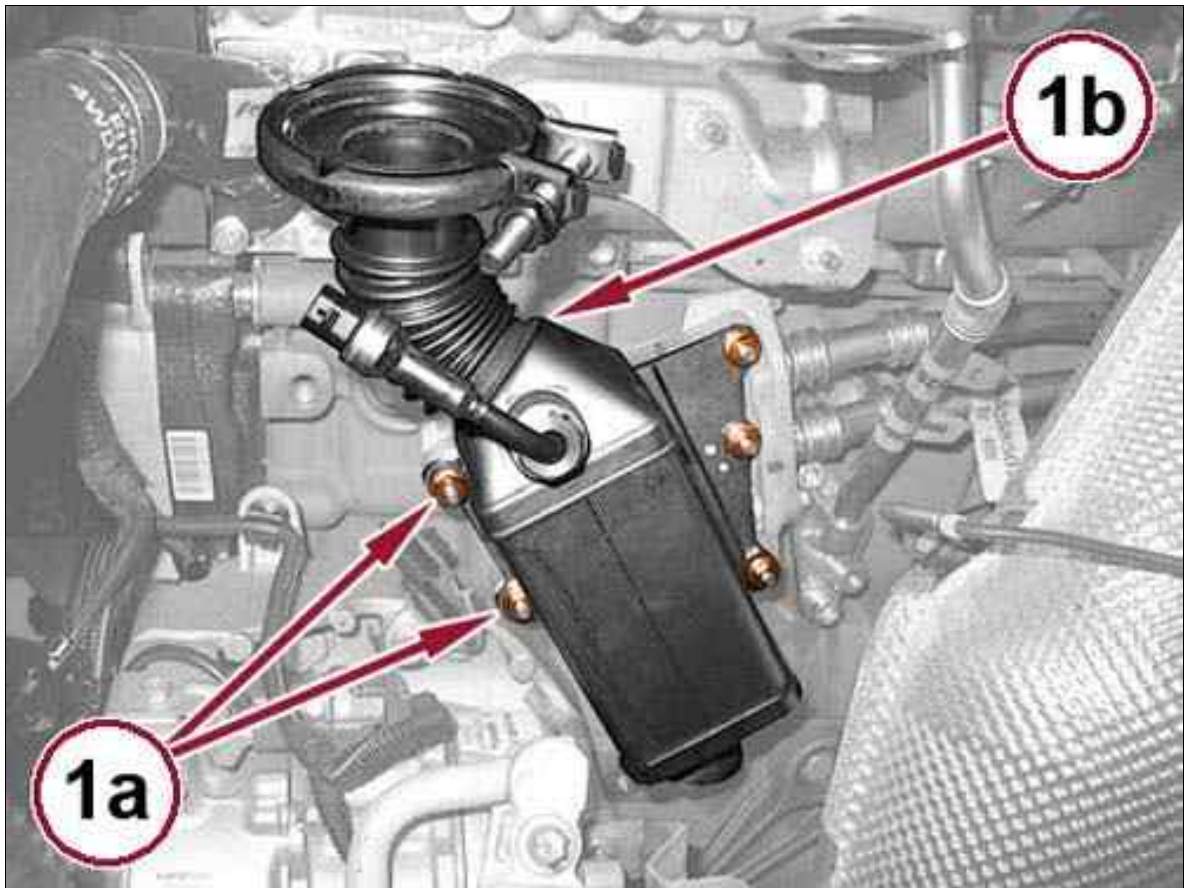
EGR Cooler Inlet Tube & Upper Clamp
